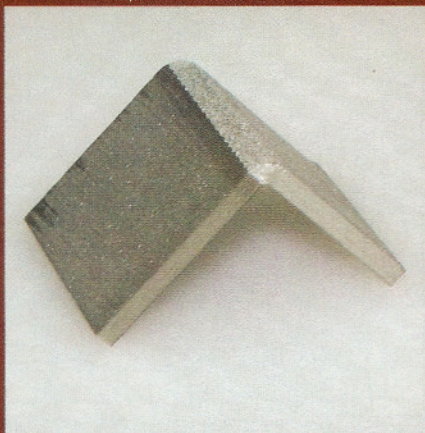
This stainless steel-aluminum sample was subjected to a 90-deg bend test. The part yielded in the aluminum away from the weld line.
